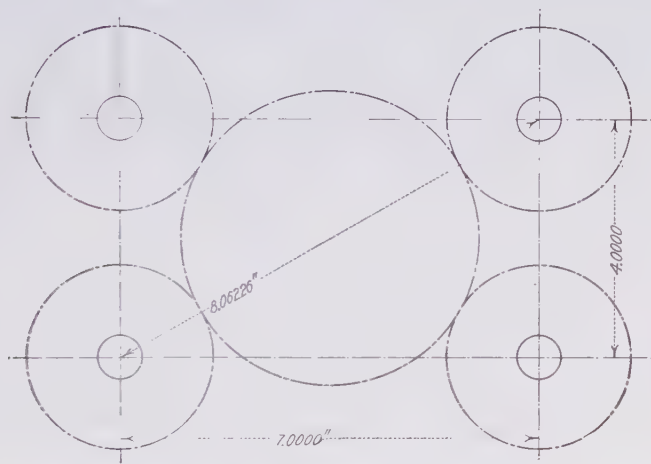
Gear train for multiple-spindle drilling attachment.
